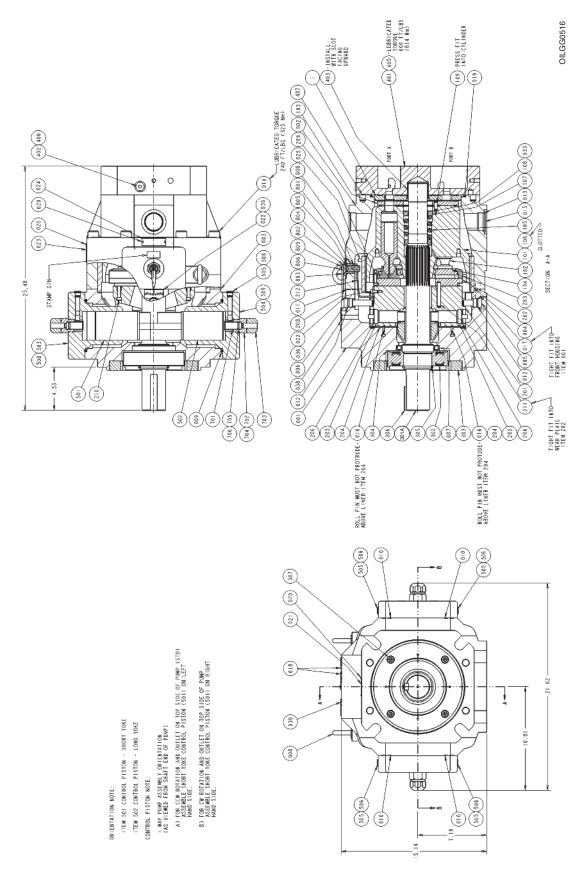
Exploded Parts Drawing for PVV-440 A2 (518260 sheet 1)
